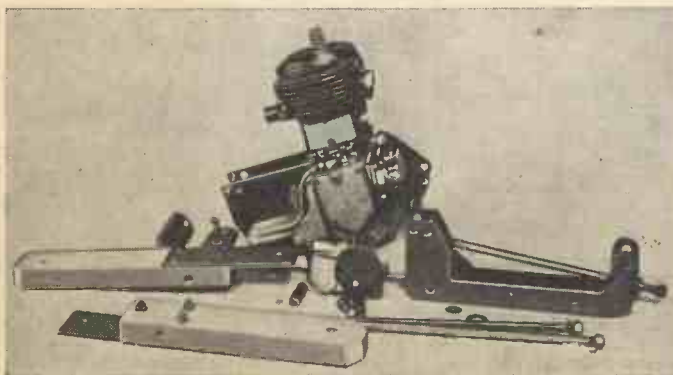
The engine, with the rear forks, engine plates, screwed anchoring rods.
